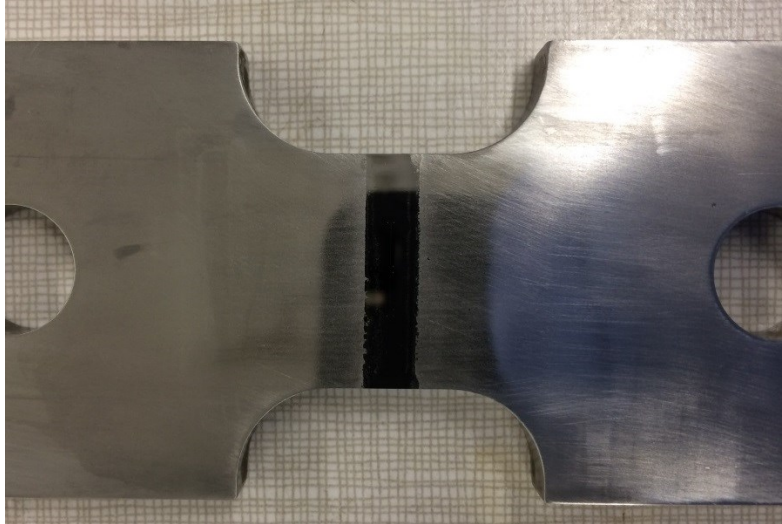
the gauge section of a sample after tests had completed. The coating was removed. The surfaces were then cleaned and polished. Note the shiny strip is where the tape coating was.
